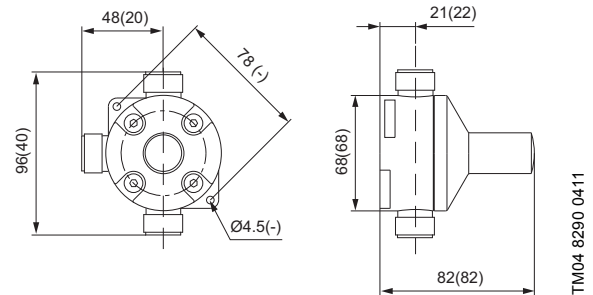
Pressure relief valve. Dimensions in brackets apply to stainless-steel version.
